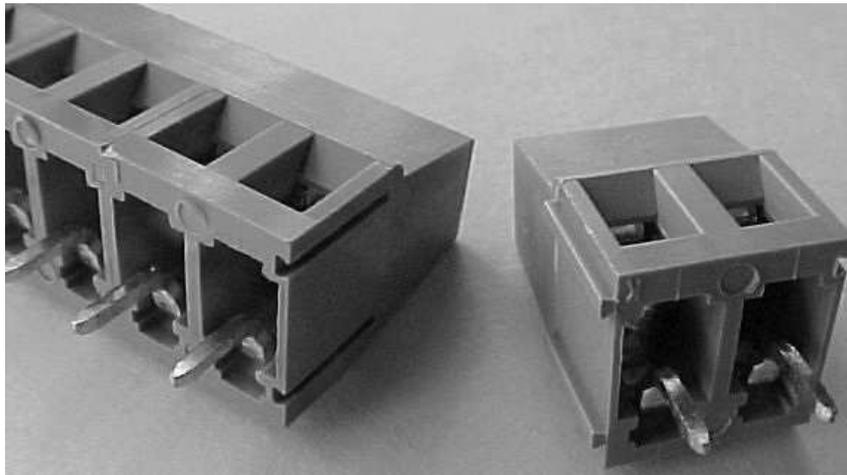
Note that the terminal blocks slide together using the side notches. Assemble the blocks together before soldering them to the board.
